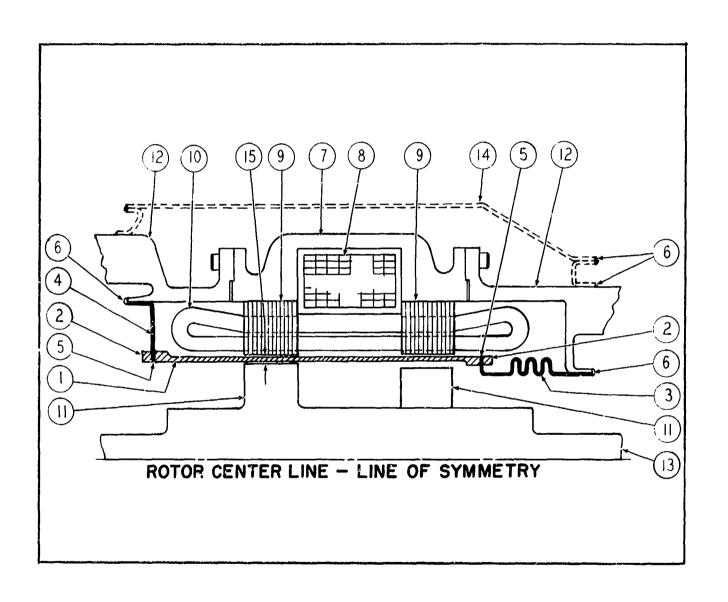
Bore Seal Assembly, Radial Gap Inductor Generator
